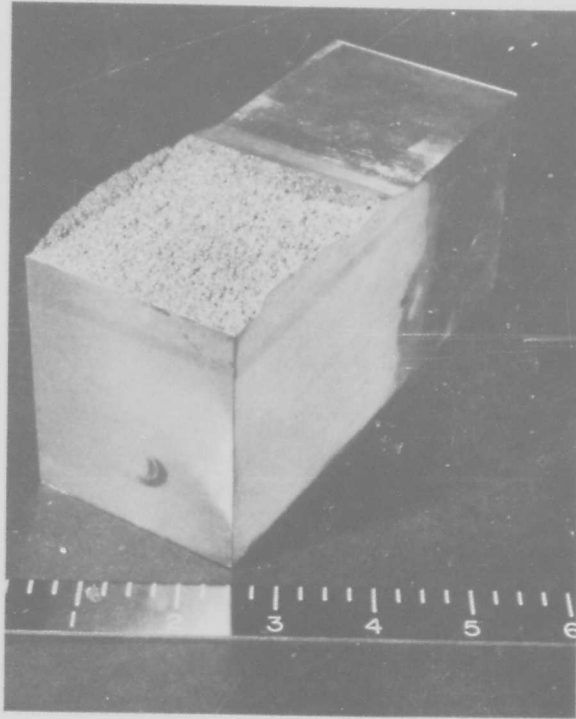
WELDED COMPACT TENSION  $K_{Ic}$  SPECIMEN
